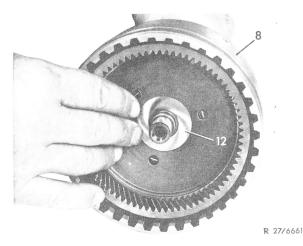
8 Clutch K 2 12 Intermediate shaft
